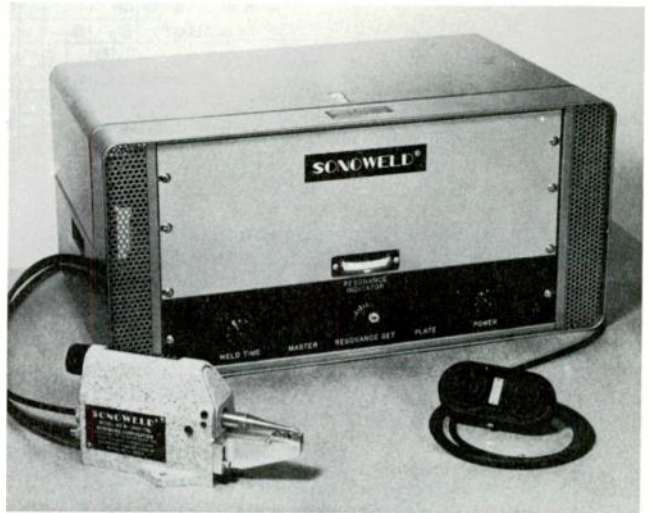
The SONOWELD model W-1040-TSL ultrasonic welder and 100 r-f watt generator.
